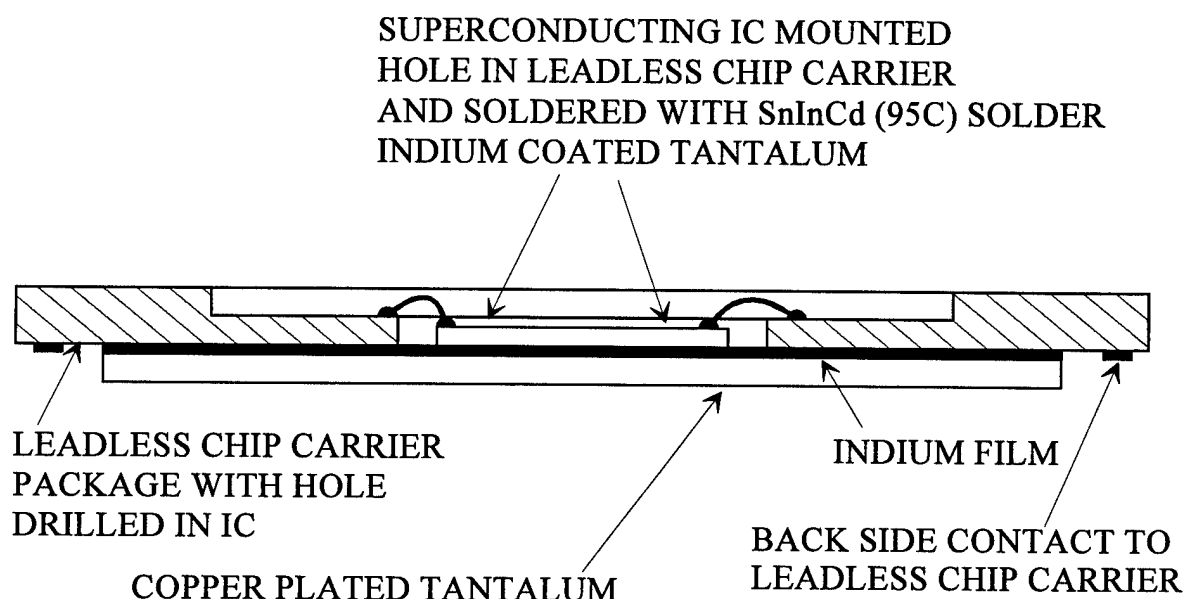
Assembly of tantalum base, with IC soldered to it, glued to the back of a ceramic package pre-drilled with a hole in the IC well.
